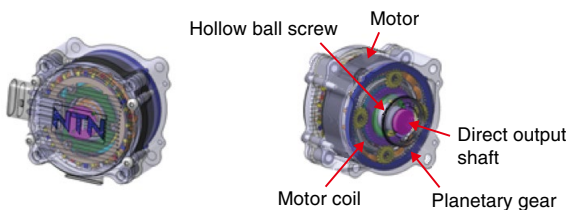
External view and configuration of Coaxial Hollow Shaft Type B III
